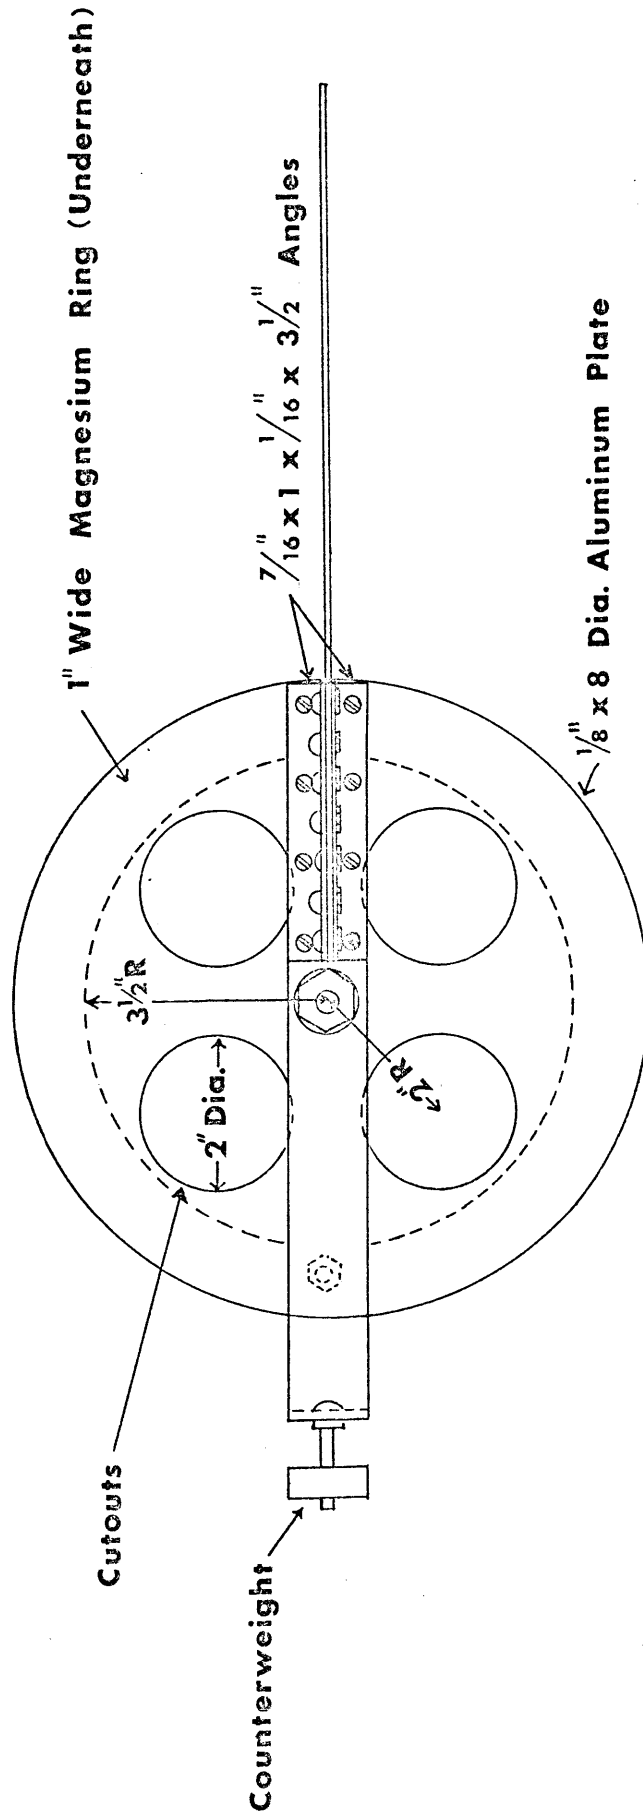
PLAN VIEW OF PROPOSED PREVAILING WIND INDICATOR
